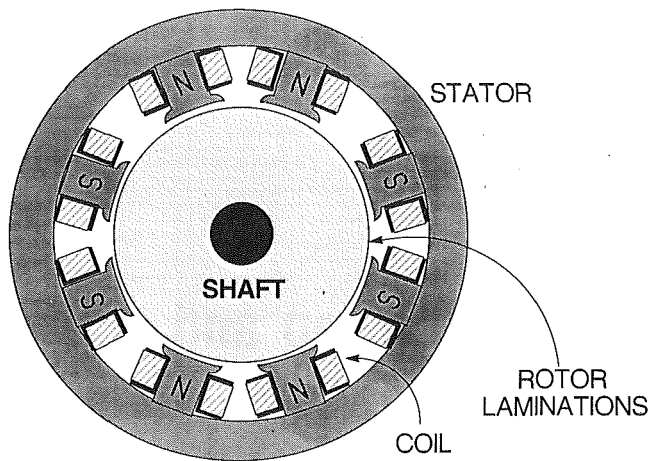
Cross-sectional view of a typical eight-pole magnetic bearing
